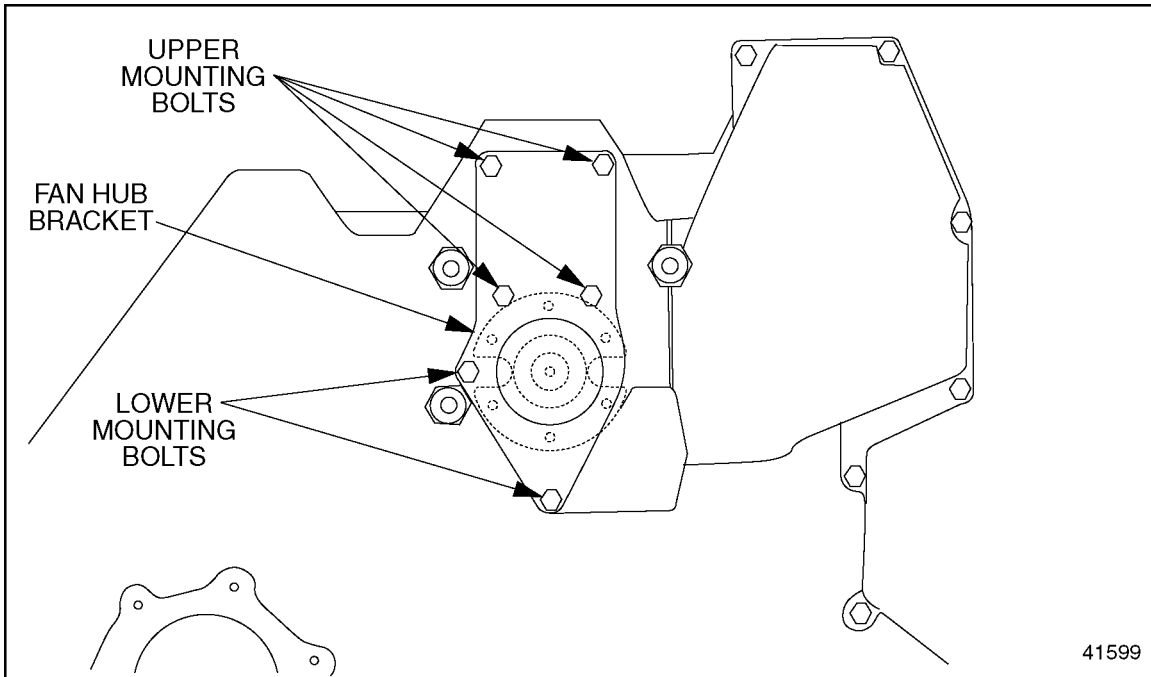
Location of Upper and Lower Fan Hub Bracket Mounting Bolts
